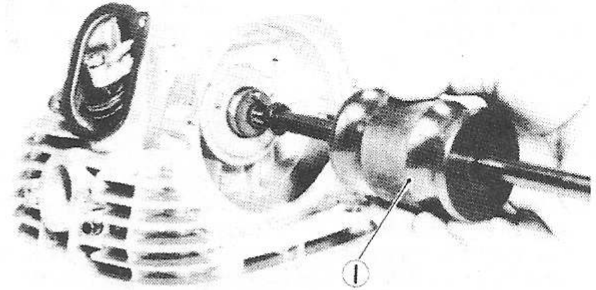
B.7 The camshaft must be removed with a slide hammer (1) — a large bolt may also work (Sec 7)
